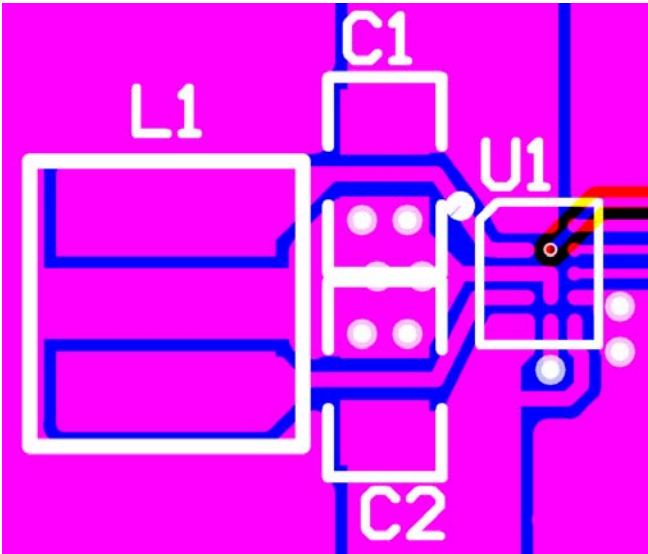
RECOMMENDED ISL9110AITNZ PCB LAYOUT
